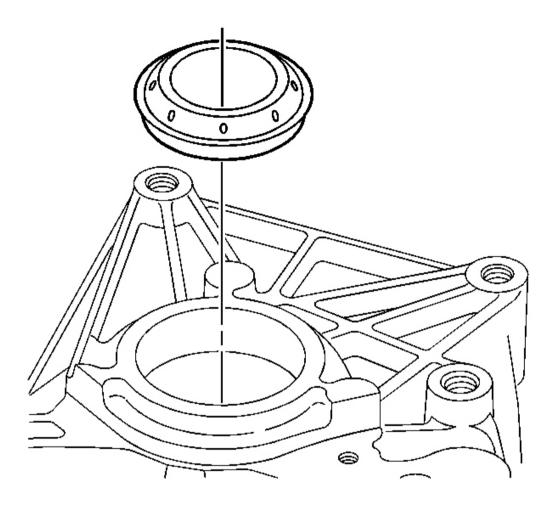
View Of Differential Output Shaft Seal Courtesy of GENERAL MOTORS CORP.
